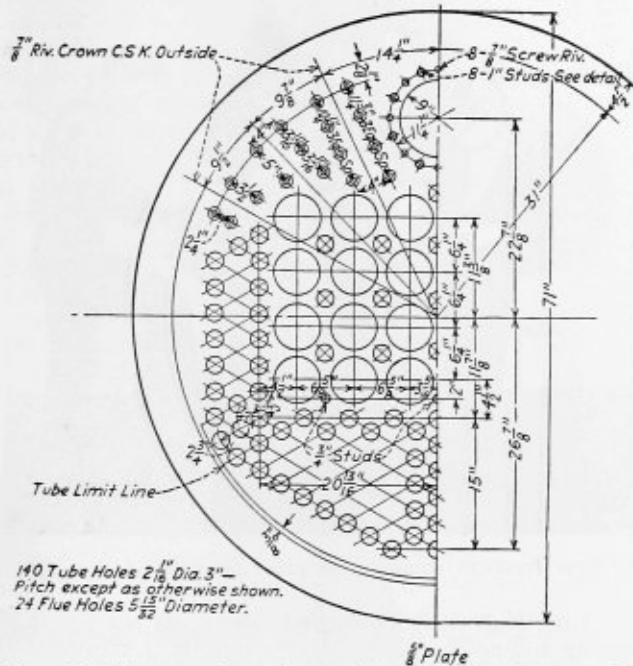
Front tube sheet. Type-A superheater flue arrangement
